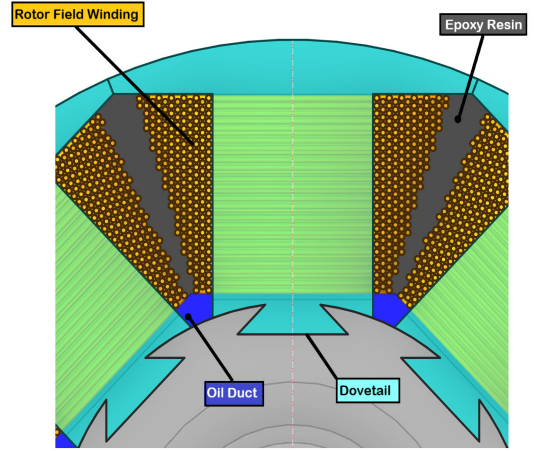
Cross section of the rotor slot: the field conductors are wound around the poles up to certain limits due to manufacturing constraints. The empty bottom part of the rotor slot is used to derive an axial oil duct and a wedge is inserted to limit the oil spread to the airgap.
